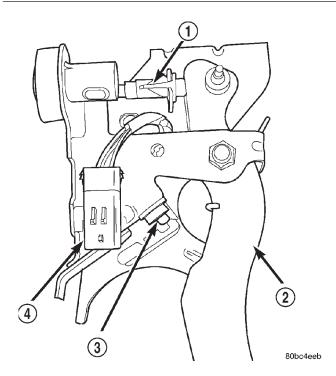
Clutch/Brake Pedal Bracket Assembly
